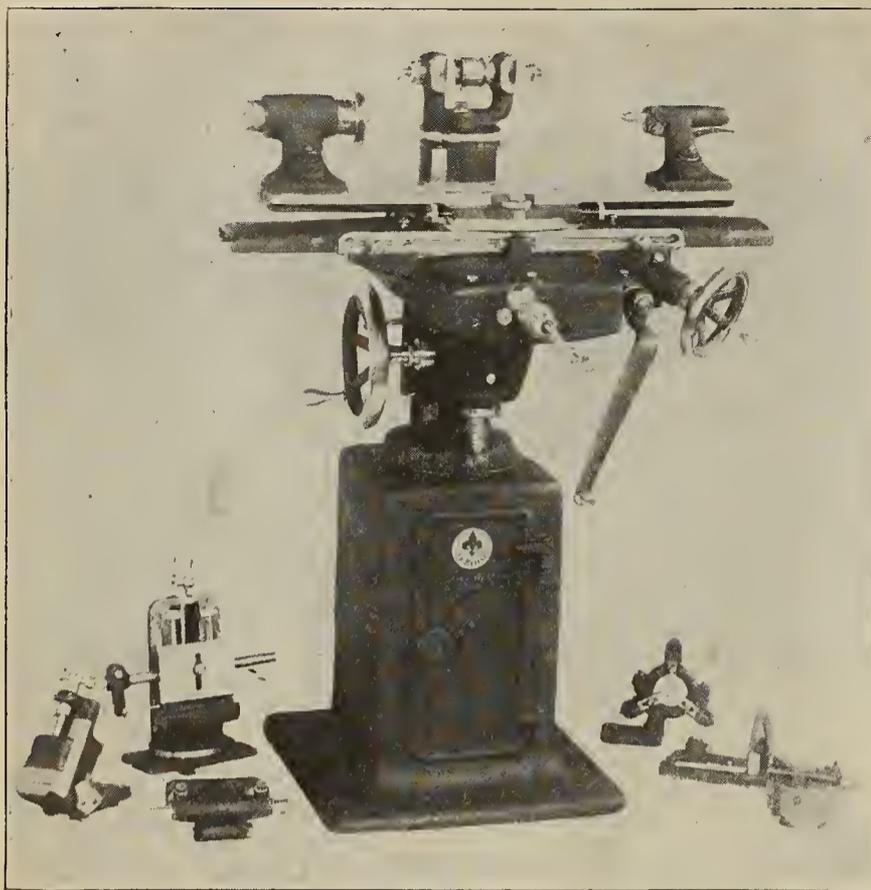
UNIVERSAL CUTTER AND TOOL GRINDER.
